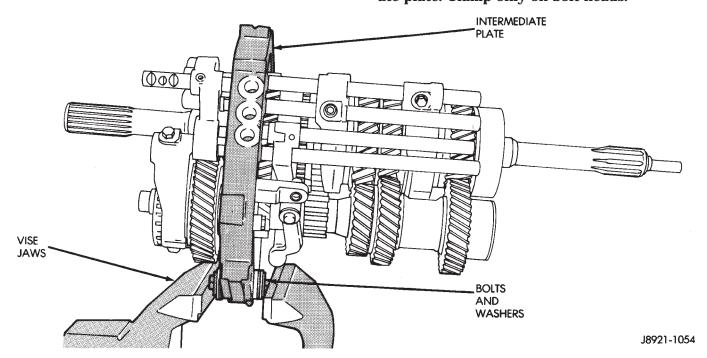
Mounting Intermediate Plate And Geartrain In Vise
